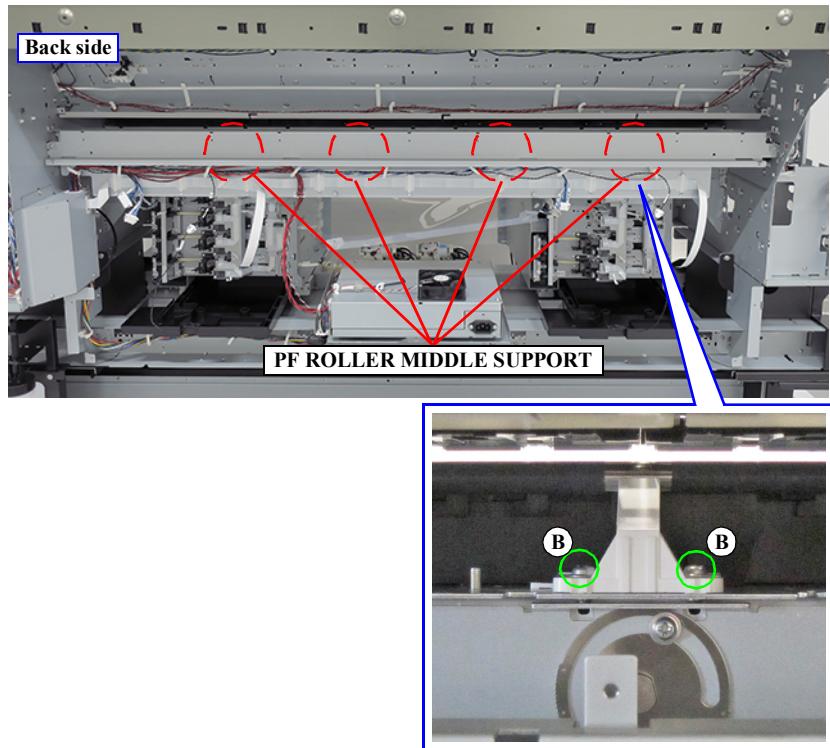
Removing the PF ROLLER MIDDLE SUPPORT (4)
